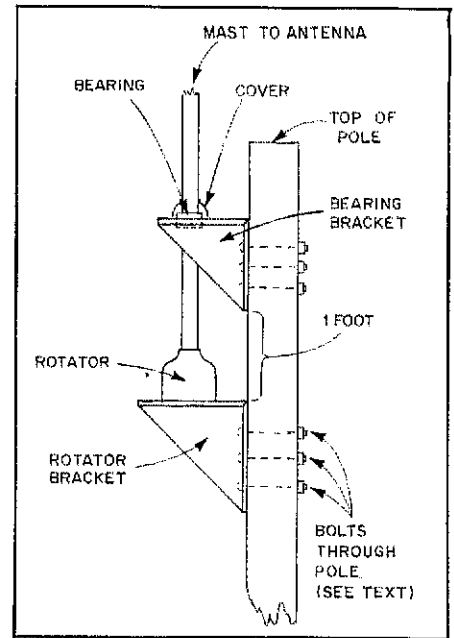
This mechanical drawing shows a side view of the complete installation attached to the wooden utility pole.
